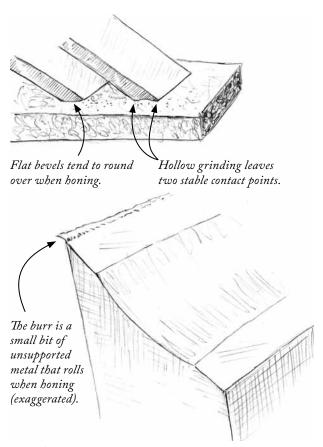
Hollow grinding makes it faster and easier to turn a burr when honing.
